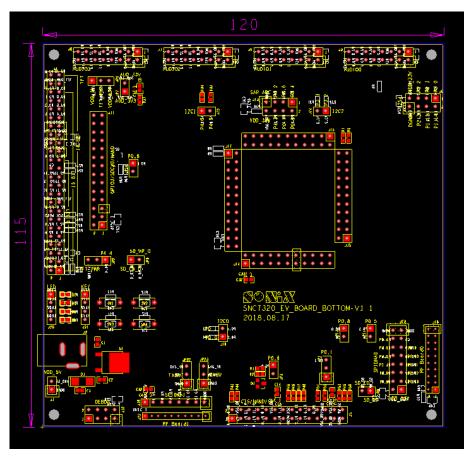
Top View of the 7320\_EV\_Board\_ Bottom-Vx.x
